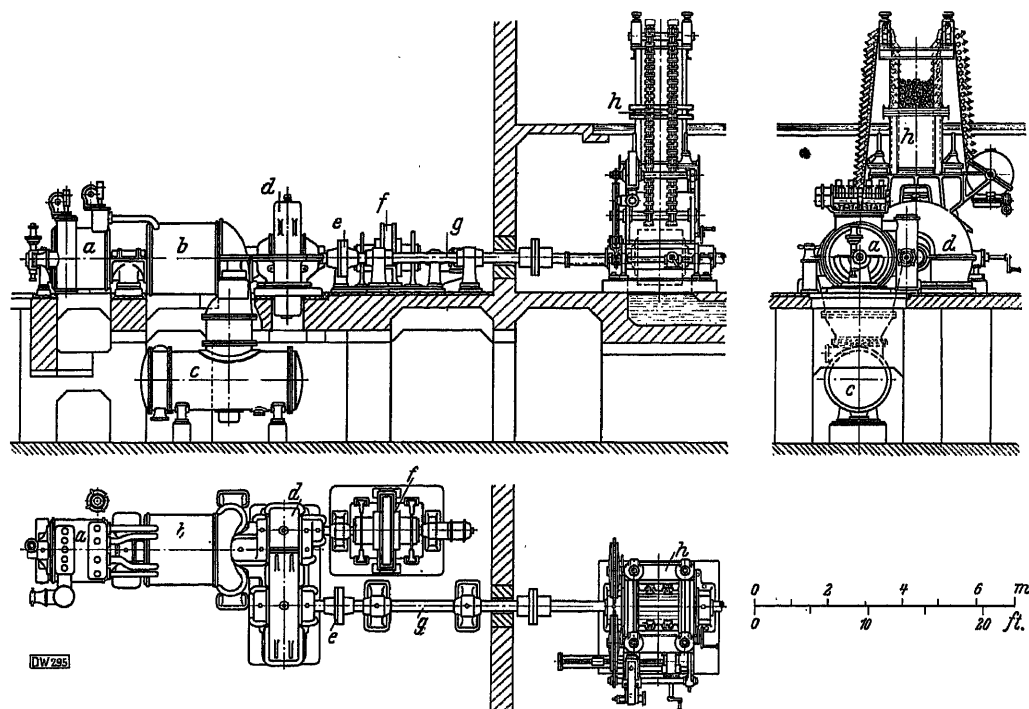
A.E.G., arrangement of a two-cylinder, geared extraction turbine driving wood grinder and D.C. generator. Output 2000 kw.; speeds 3000/240/750 R.P.M.
